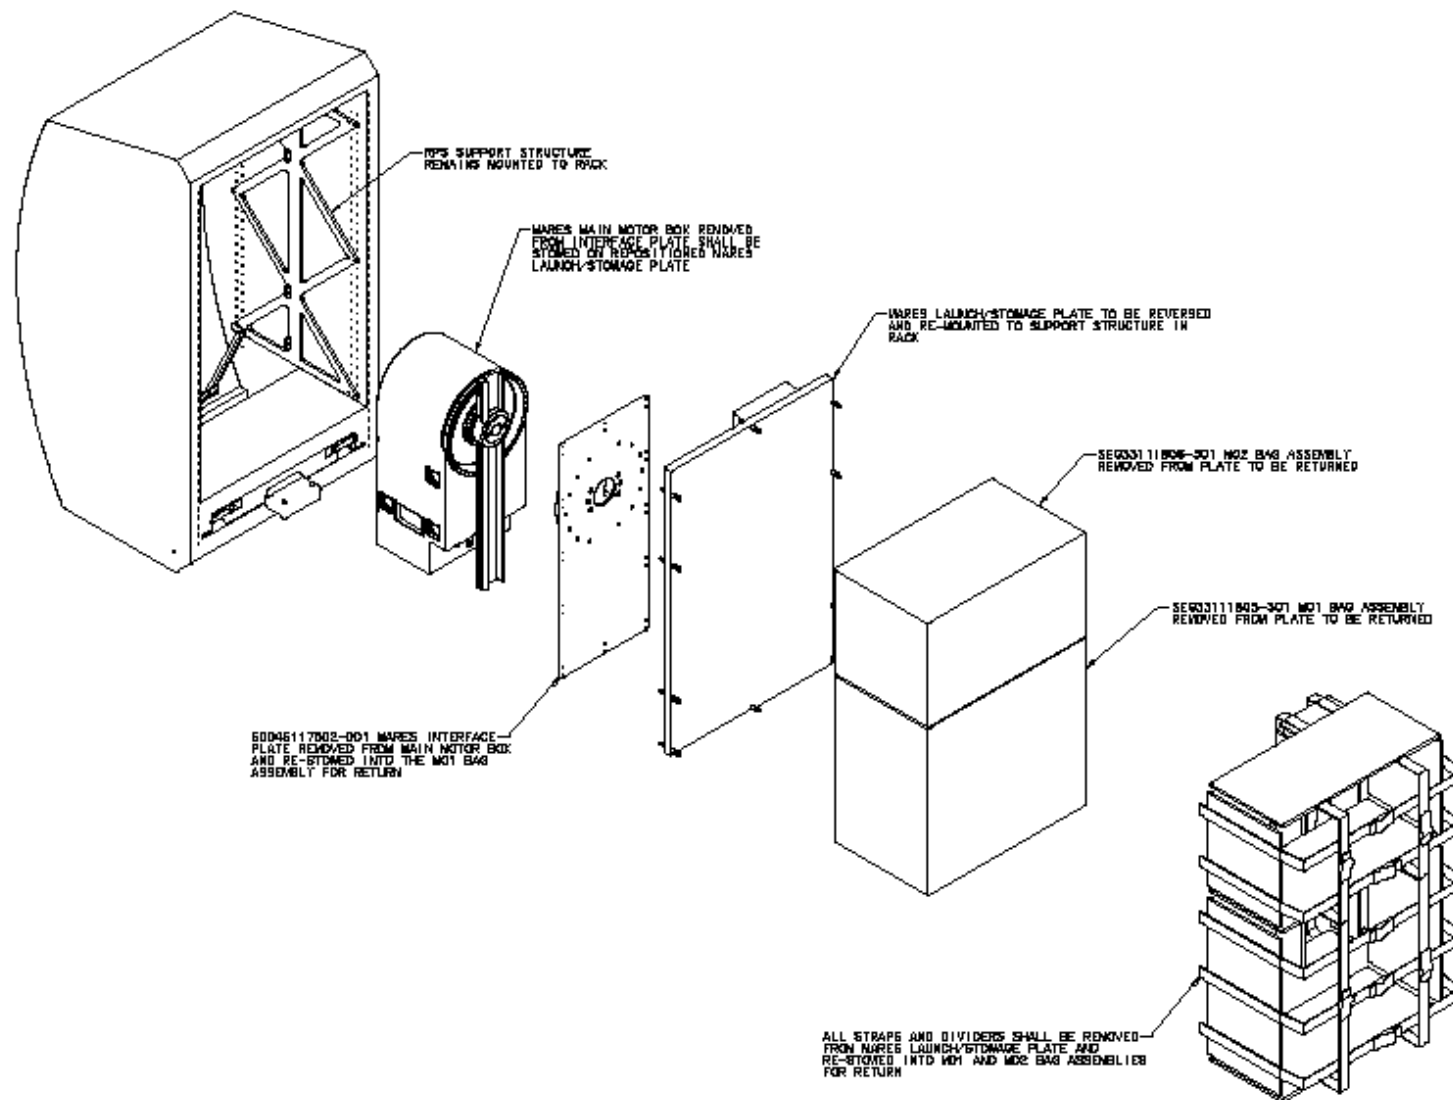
HRF MARES Rack, Launch Configuration (Exploded View)
